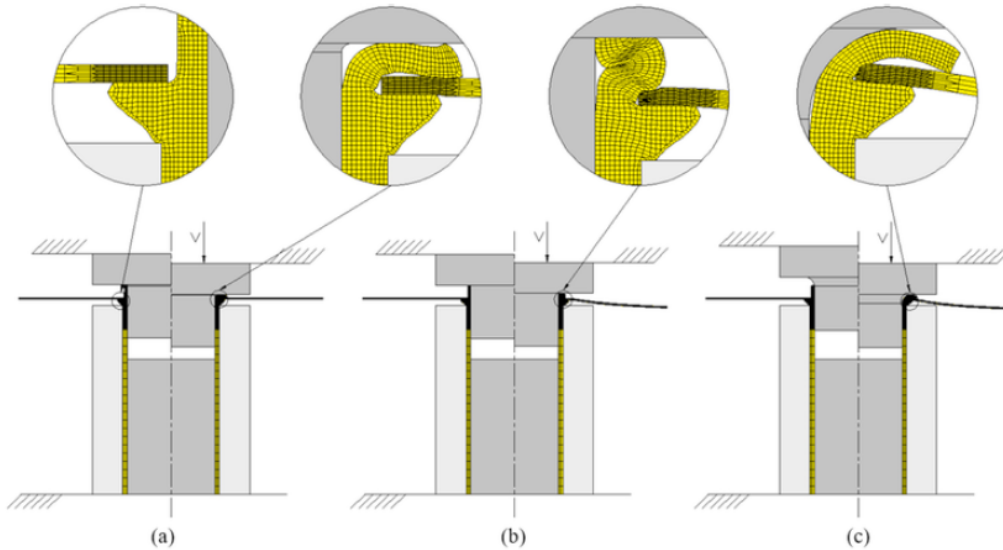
Joining sheet-bulk formed tubes ($l_{gap} = 7$ mm and $t = 1$ mm) to sheets by flaring out (and locking) the upper tube end inserted in the sheet hole. (a) Finite element predicted geometry of a sound joint obtained with a corner radius of the upper flaring die $r_c = 0.3$ mm. (b) Finite element predicted geometry of an inadmissible joint produced with an upper flaring die without corner radius ($r_c = 0$ mm). (c) Finite element predicted geometry of an inadmissible joint produced with an upper flaring die with a very large corner radius ($r_c = 3$ mm).
